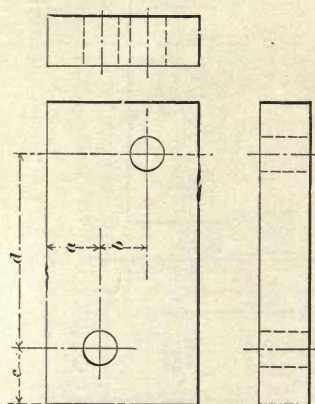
Simplest Form of Jig for Piece shown in Fig. 61
